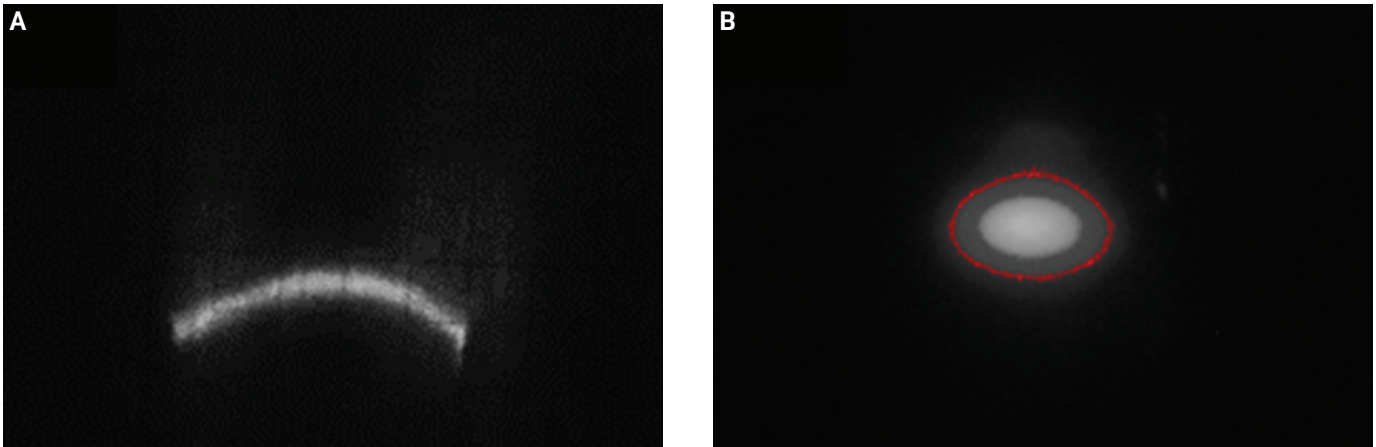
Images illustrating the vision-sensing structure. A — Topside image of weld pool; B — backside image of weld pool.
